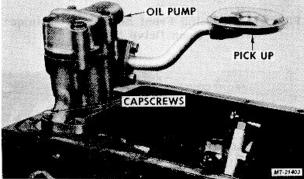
A Oil Pump Mounting Details for Engines With Serial No. 51135 and Up
